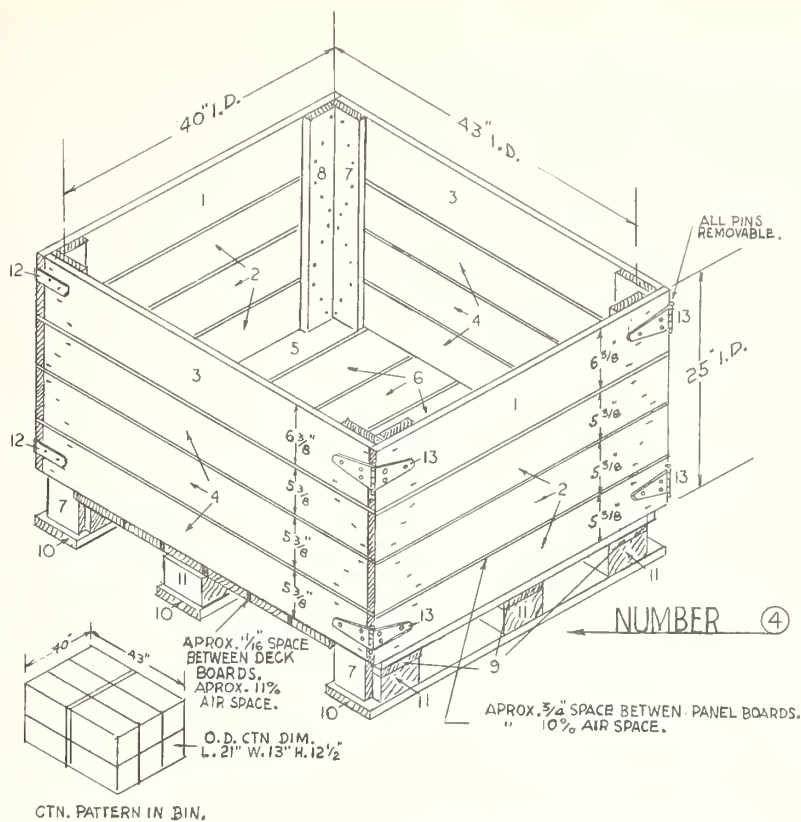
Test pallet box No. 4 with spaced sides and bottom, and an inside depth of 25 inches.
